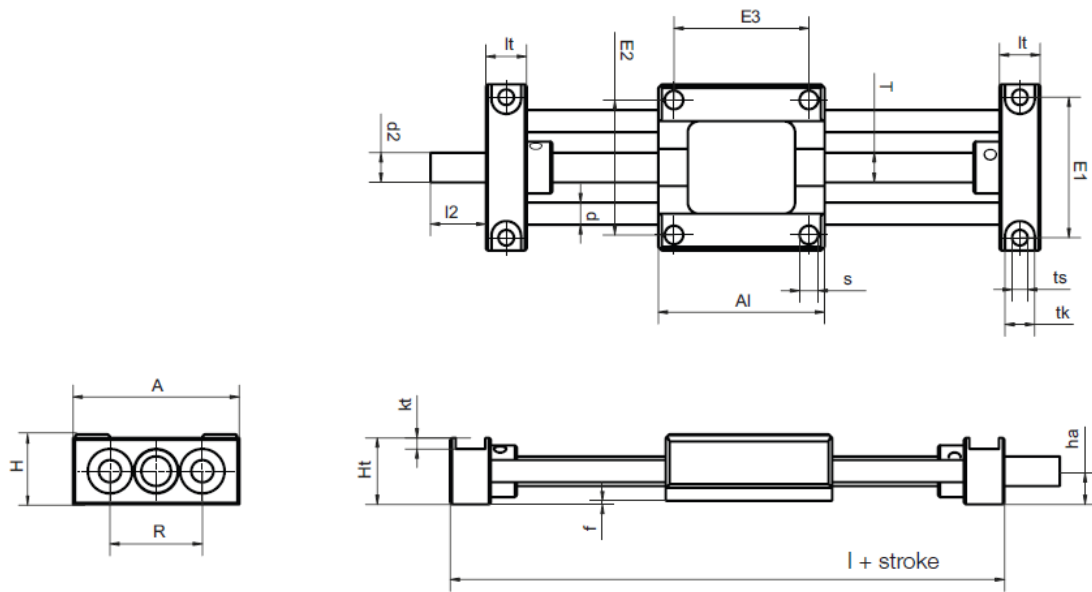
Technical drawing of the drylin SHTP-01-06-AWM linear table.
